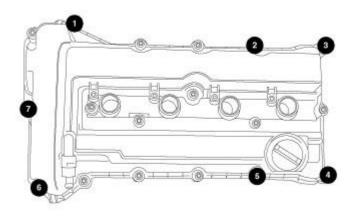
Cylinder Head Cover Gaskets Location Courtesy of CHRYSLER GROUP, LLC
